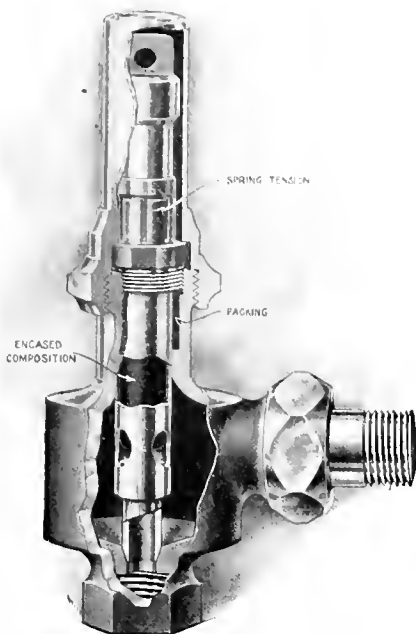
Thermostatic Valve used in Connection with a Vacuum Pump
